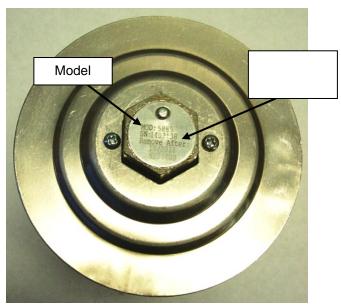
71JSK-44MA Jack Screw Kit (GAS/E85) 71JSK-4RMT Jack Screw Kit (GAS/E85)
